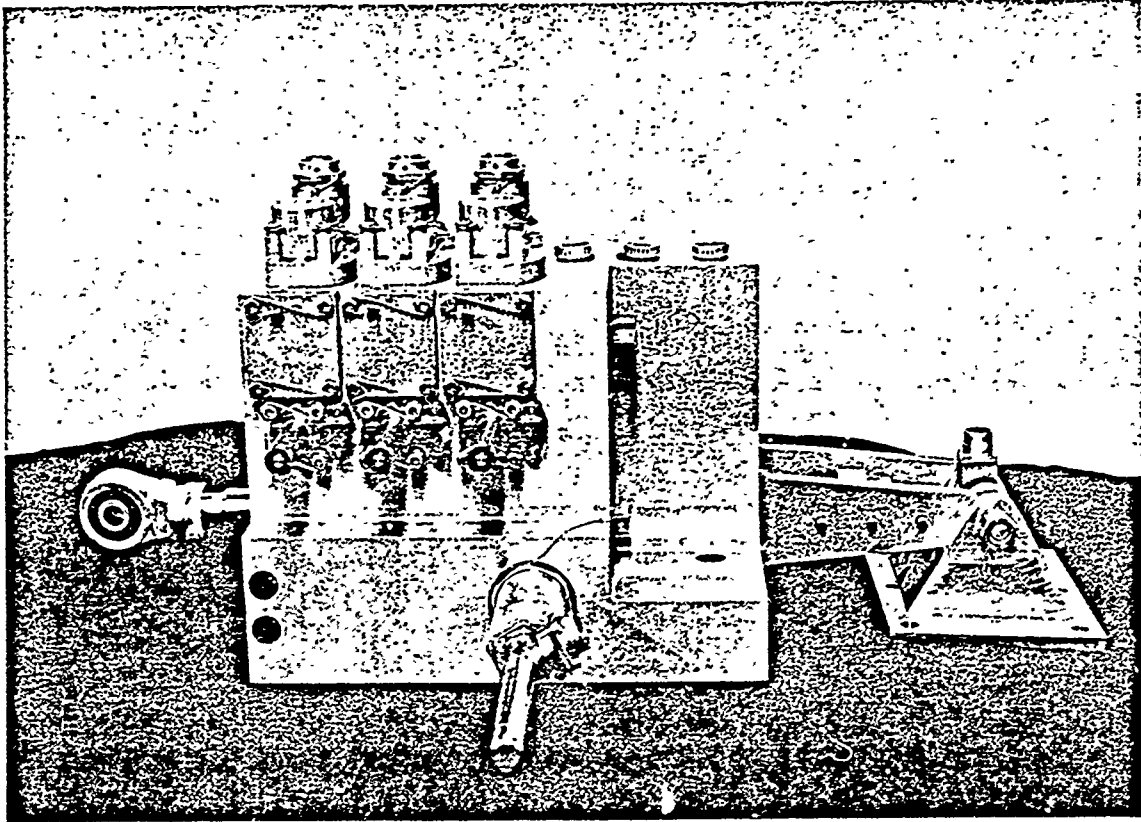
SERVO ACTUATOR ASSEMBLY – TRANSDUCER SIDE
